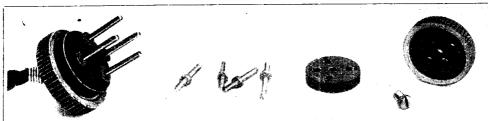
Connexions for H.T. Fig. 6. Components of the four-pin plug are shown dissembled, and L.T. batteries can be Four valve legs are used as pins, and the ebonite disks are screwed made by this plug together
